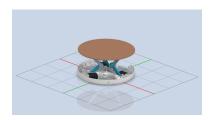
Assembly 3D made by Inventor Software with CAD pieces.
